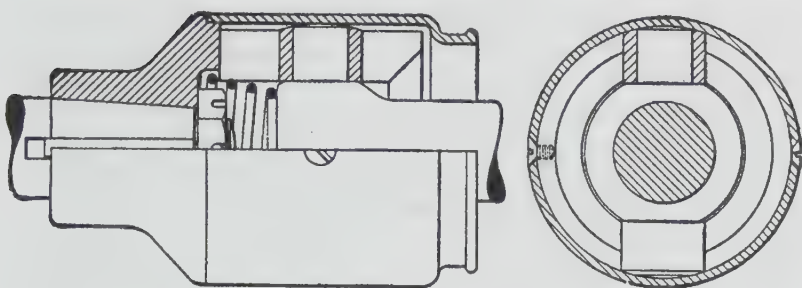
BLOCK AND TRUNNION TYPE UNIVERSAL JOINT.
